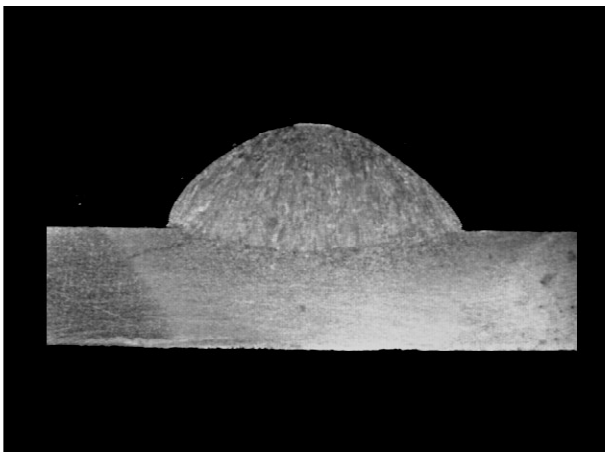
The cross section of the resultant weld bead (case B).
